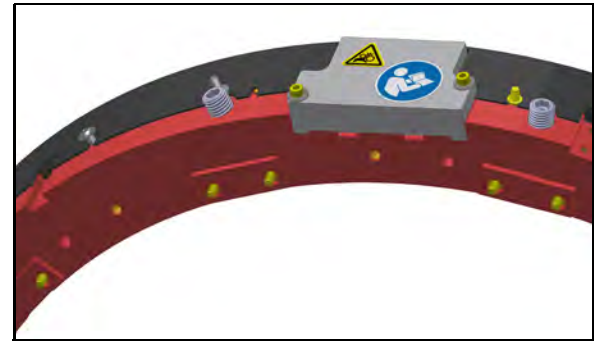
COVER GEAR GUARD (P/N 102861)
